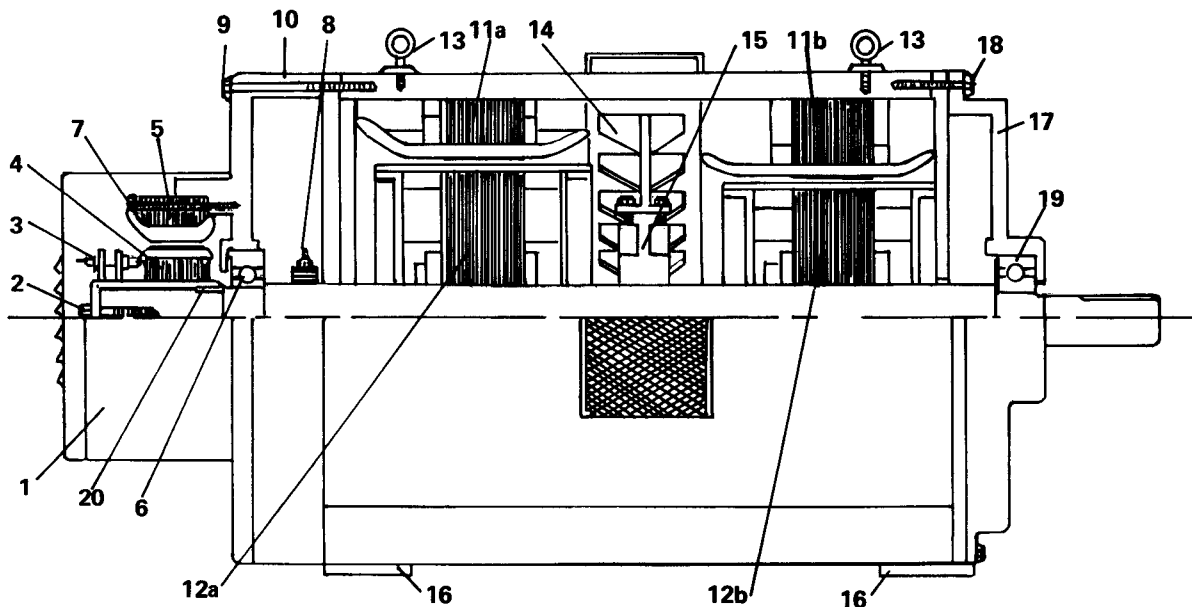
KATO Common Frame Brushless Motor-Generator Assembly consisting of a Brushless Revolving Field Generator Brushless Exciter and Induction Motor - Unidirectional Cooling Fan mounted between generator and motor rotor.
